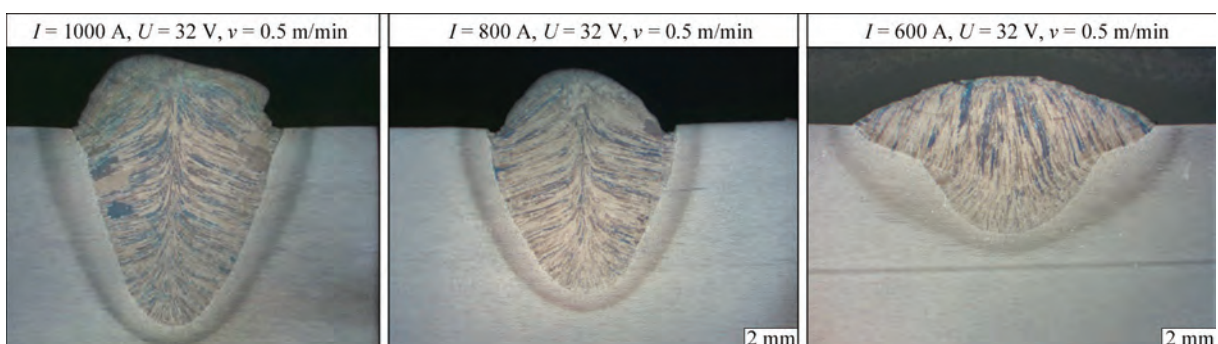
Cross sections of the welds made with different welding parameters
